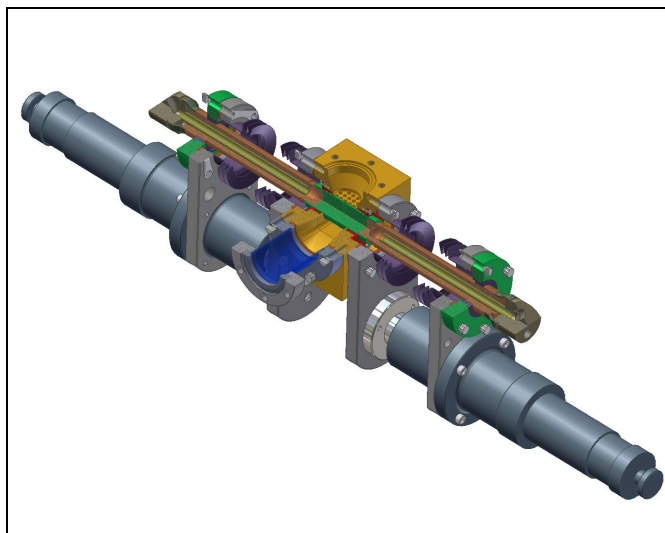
(top left) Sectional view of APS scraper assembly, round blades (closed).
